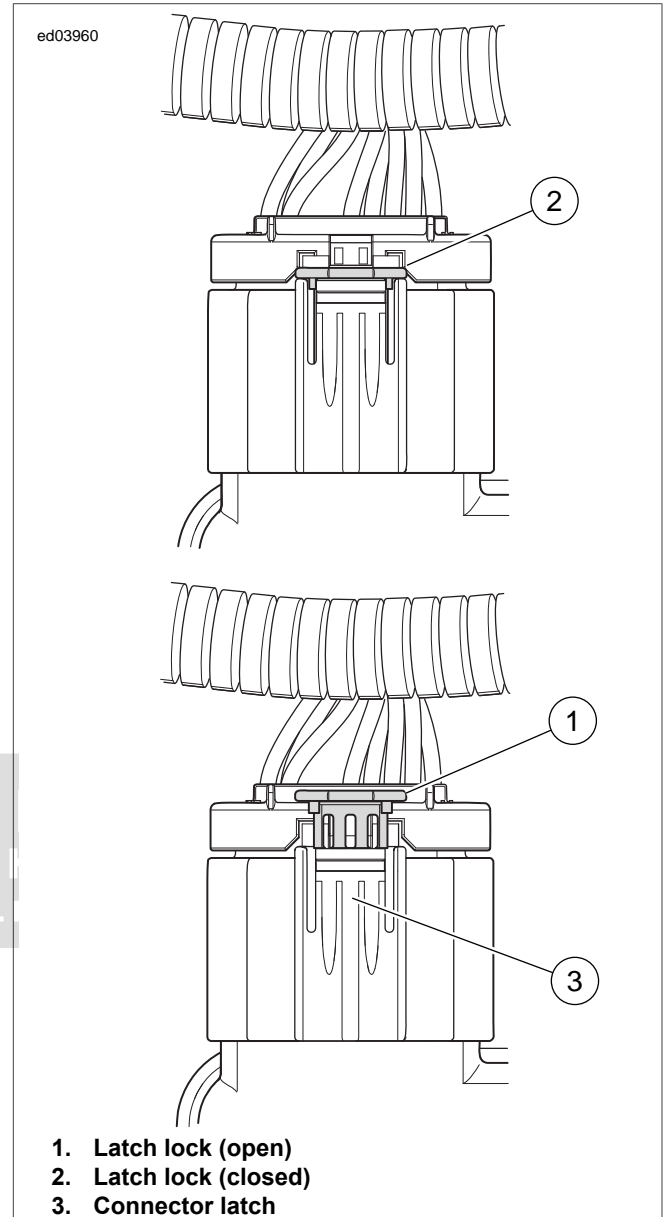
Tyco GET 64 Sealed Connector Latch and Lock
